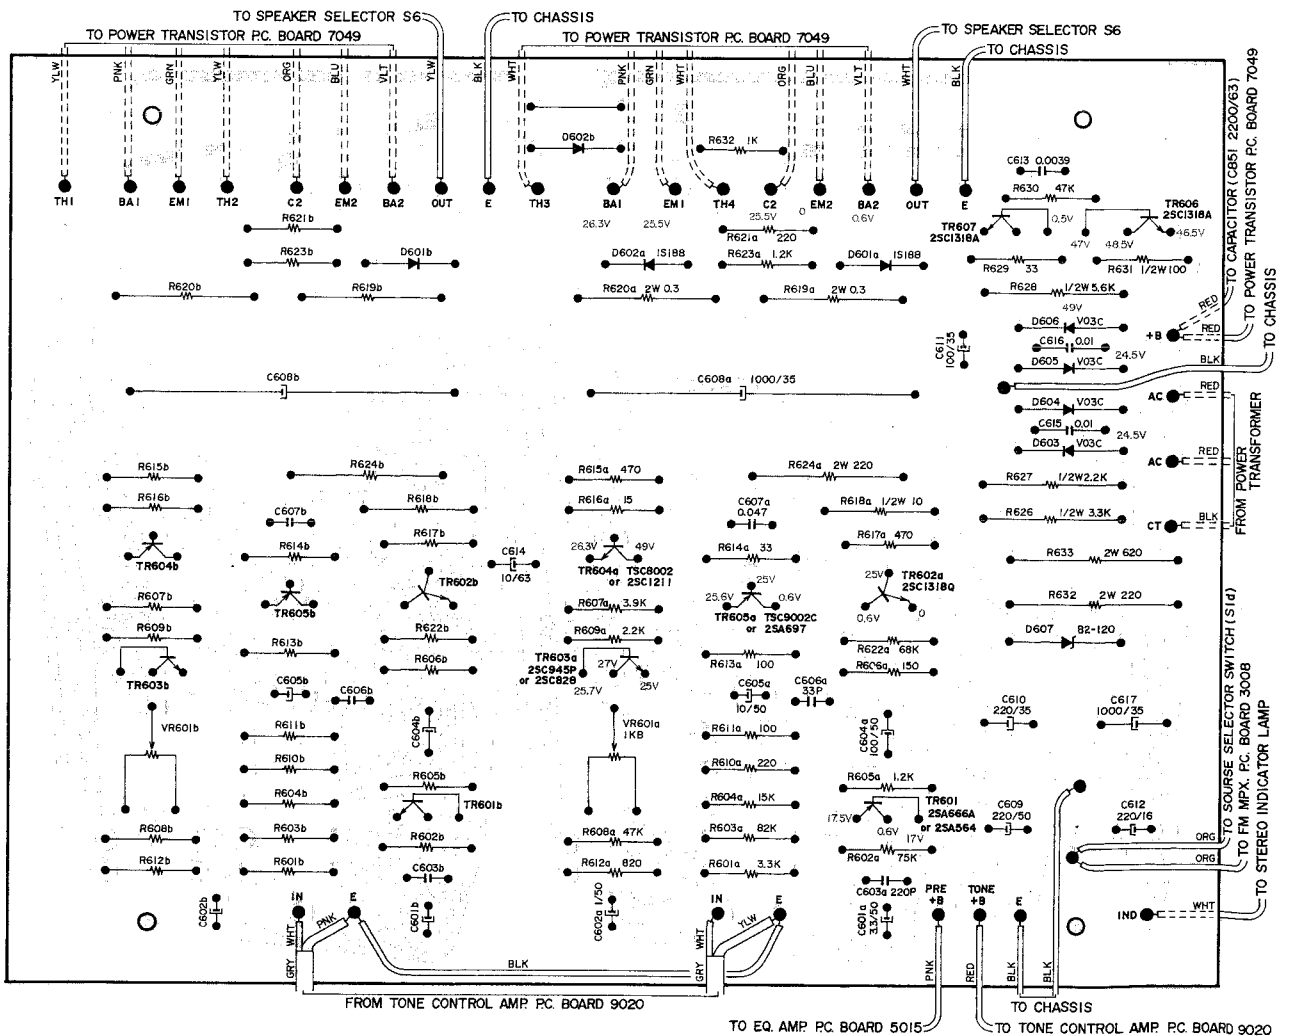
POWER AMP. P.C. BOARD 6023 (Reverse Side)
